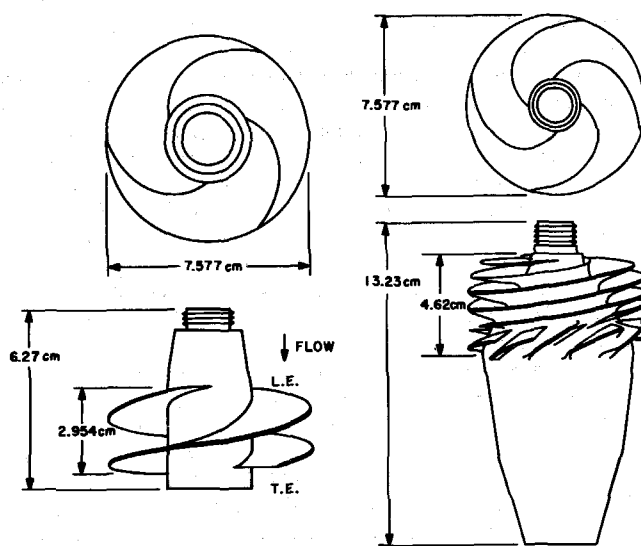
Sketches of the two 7.58 cm diameter impellers tested. Impeller V on the left is a simple 9° helical inducer. Impeller IV on the right is 1/4 scale model of the low pressure oxidizer pump in the Space Shuttle Main Engine. (Simple ellipsoidal nose cones were added but are not shown.)
